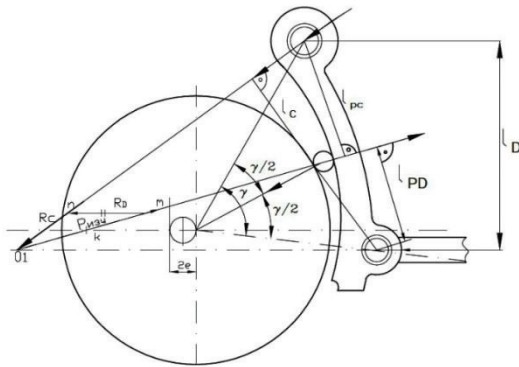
Forces of grinding of the rotor crusher of an eccentric type
